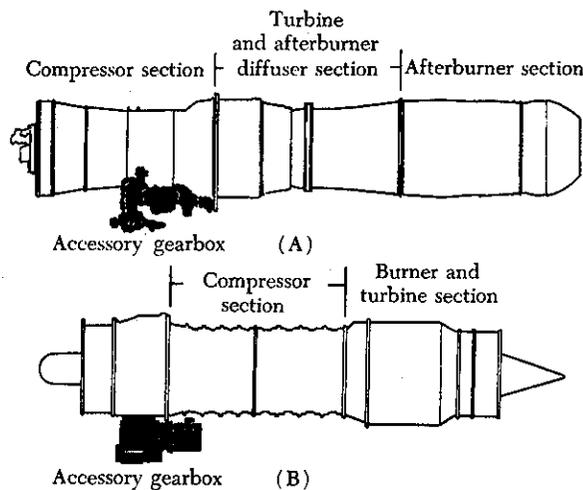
(A) Accessory gearbox mounted beneath the compressor; (B) Accessory gearbox mounted beneath the front bearing support.
